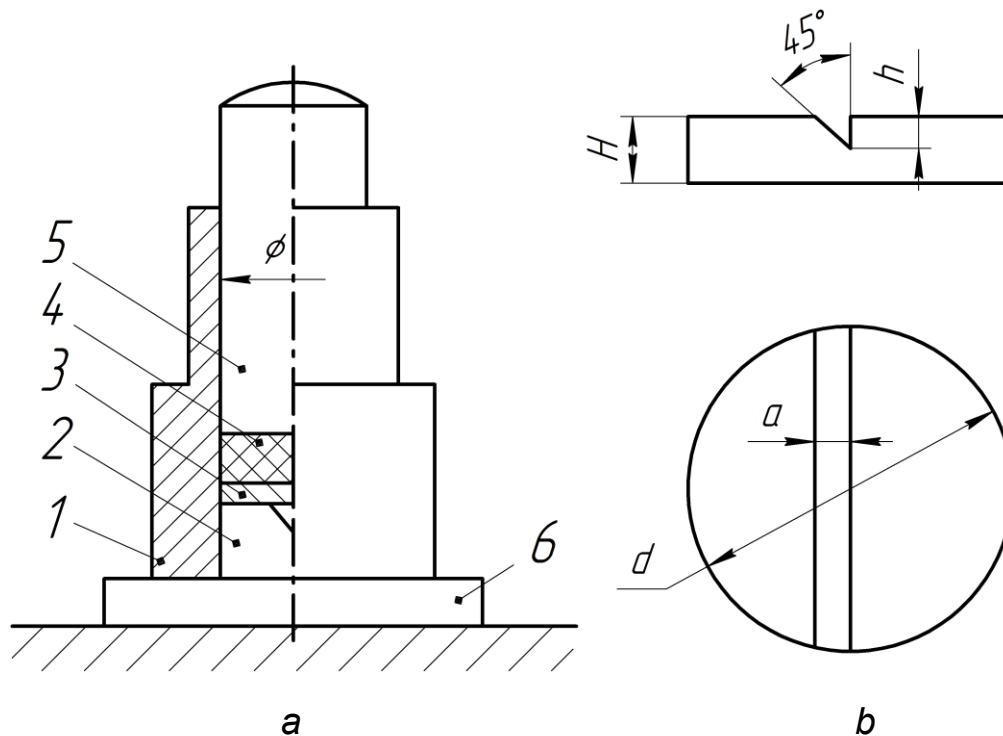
Rubber pad cutting: 1 – container; 2 – die; 3 – sheet stock; 4 – rubber pad; 5 – punch
